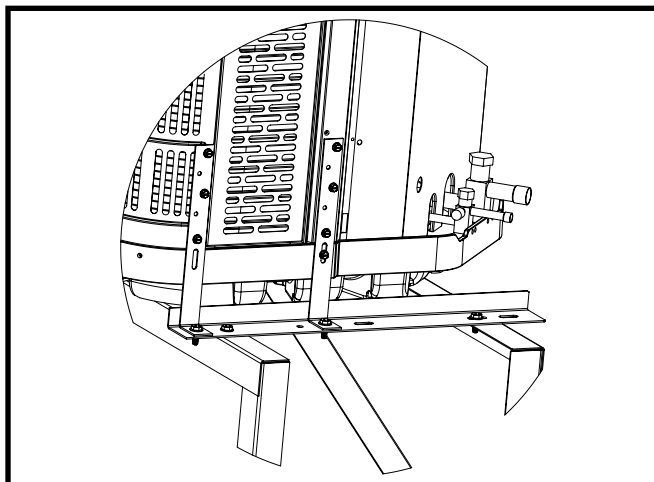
Rear Brackets For Small Footprint - Control Panel Right
